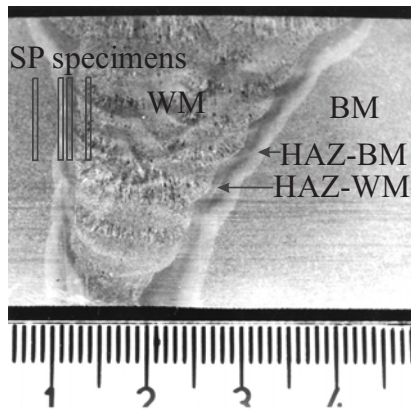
Welded joint of P91 base metal and P91 weld metal.
